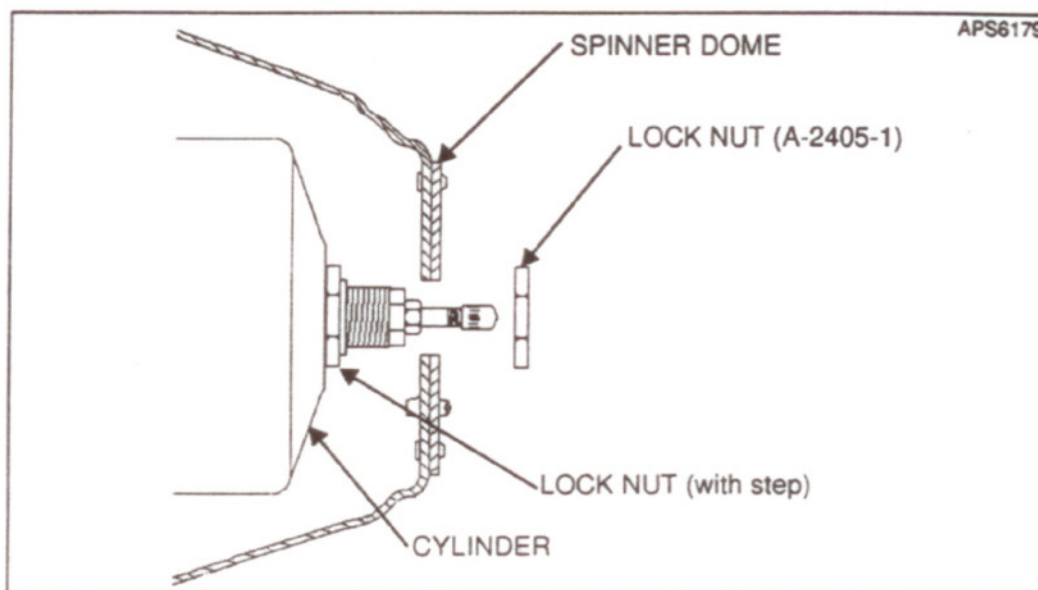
Two-Piece Spinner Mounting (Procedure 1)
